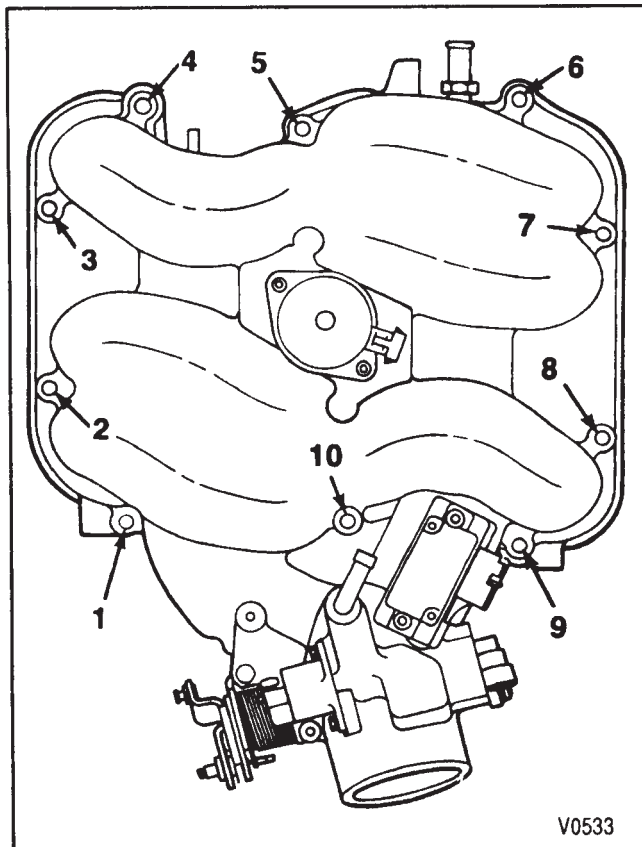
Upper Intake Manifold Bolt Tightening Sequence (VIN W Engine)
